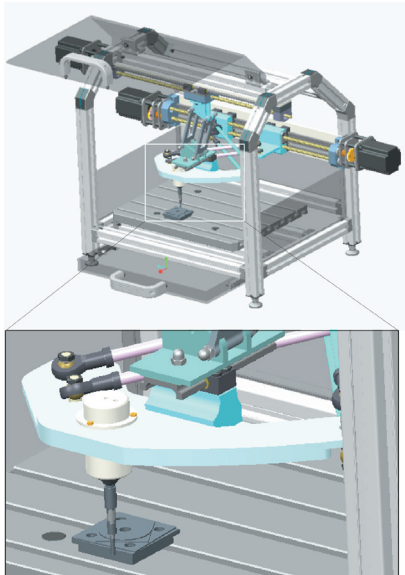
Machining simulation in the CAD/CAM system - pn101\_st V2.5
